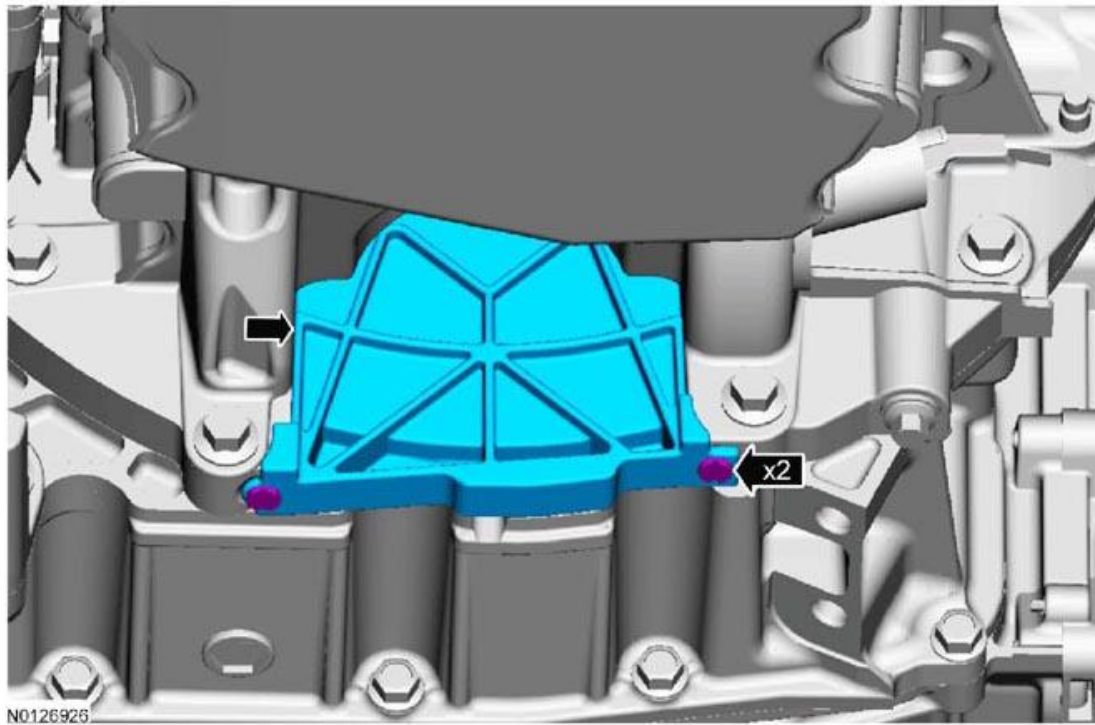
Locating Catalytic Converter Lower Bracket Bolts
